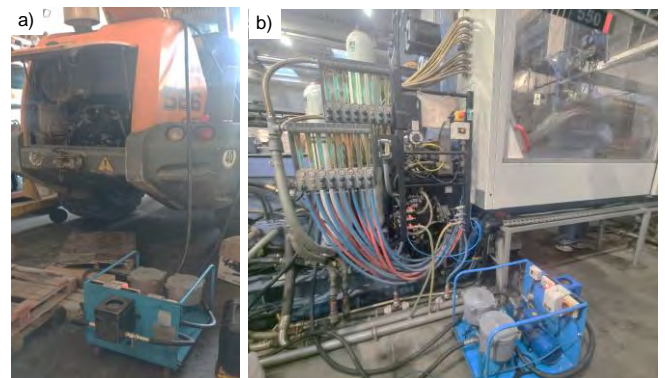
View of the machine's use during microfiltration of hydraulic oil in: a) Liebherr 566 wheel loader, b) Billion H3500/550 injection molding machine [fot. S. Kołodziejowski]
